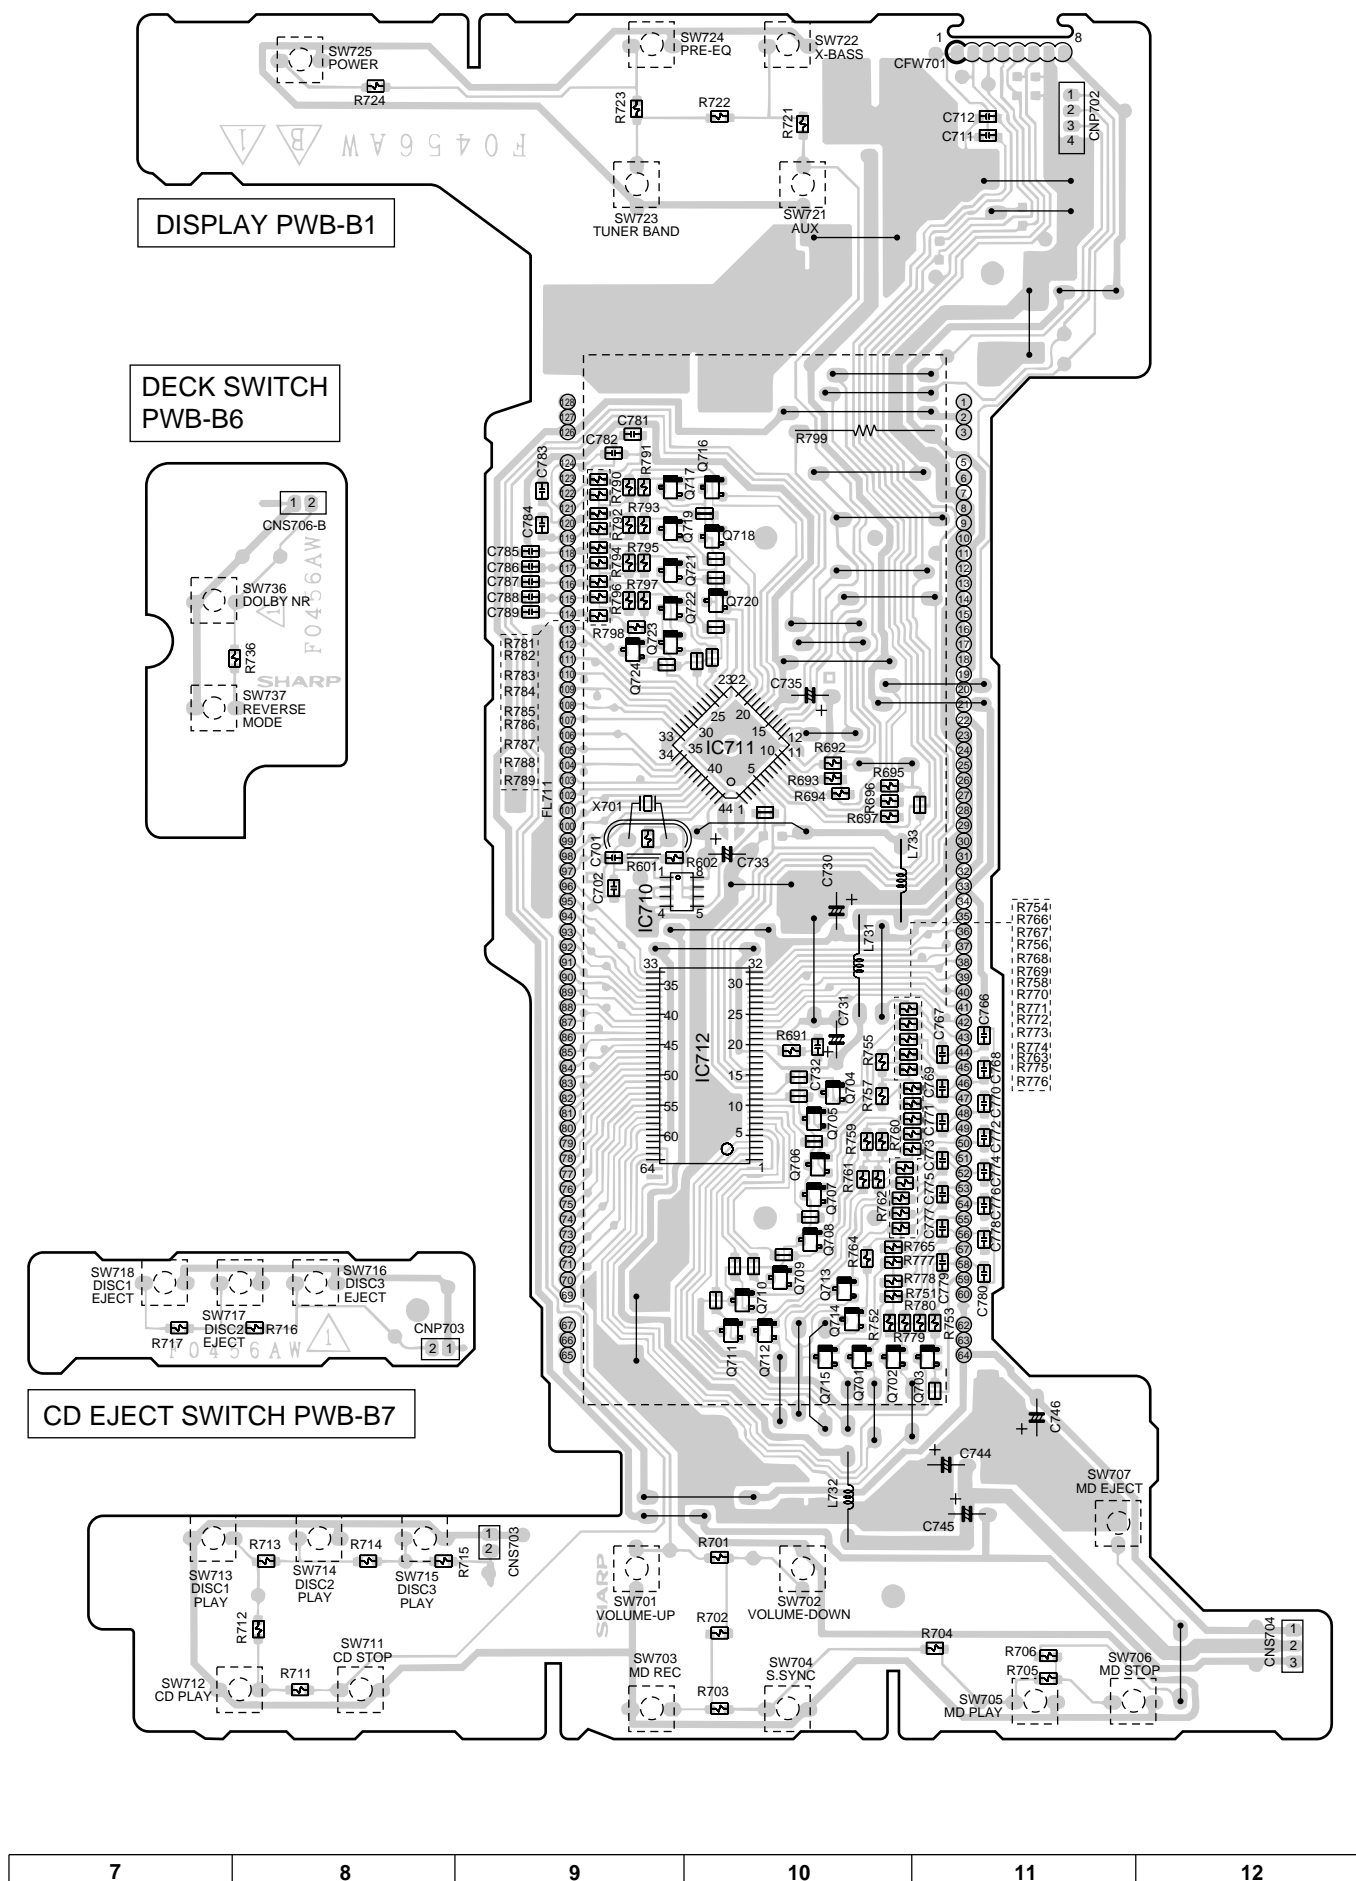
WIRING SIDE OF P.W.BOARD (6/11)
